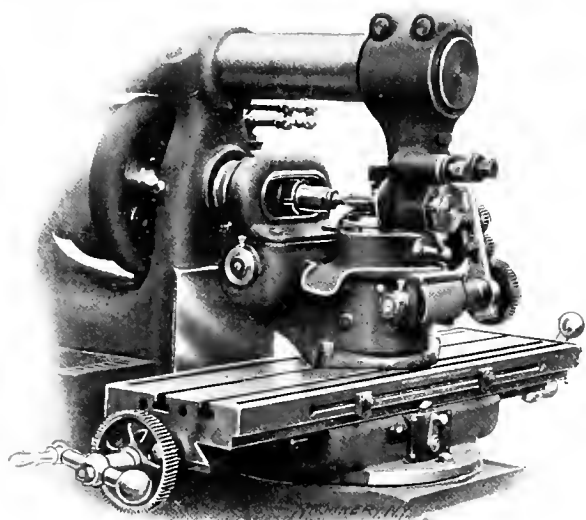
Hobbing a Worm-wheel without Previous Gashing, in a Positively-driven Attachment in the Milling Machine.
